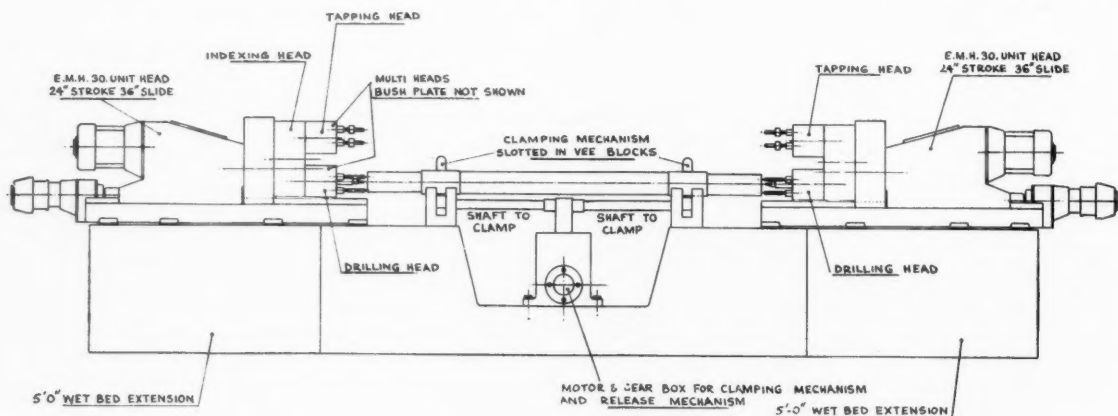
Axle drilling and tapping machine with built-in handling equipment.
